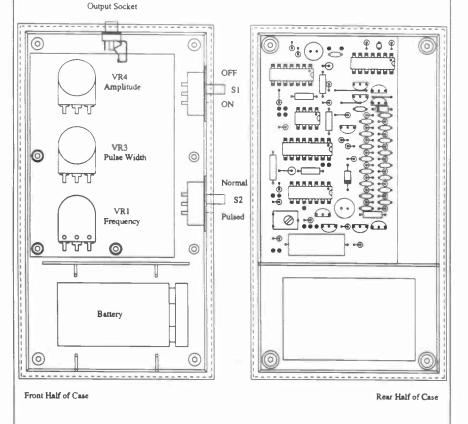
Layout of components inside the two halves of the specifed case. Make sure that the connecting tags of the output socket do not touch the metal control mounting plate. whilst resistor R16 gives protection in the event of accidental short circuit.
